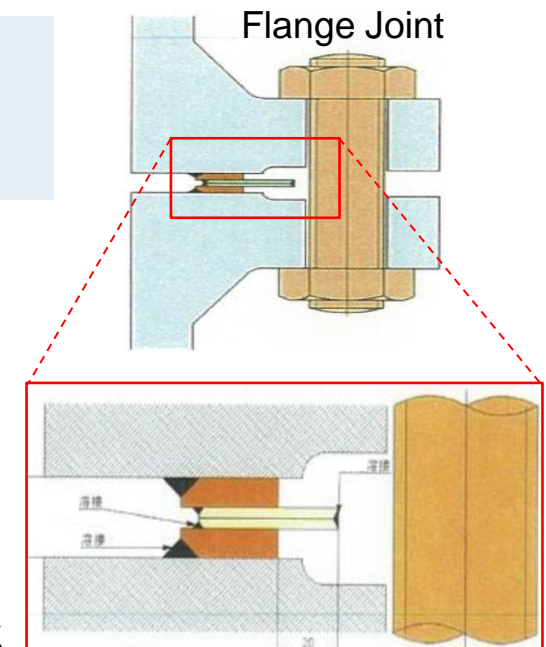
Lip Seal Welding Structure of the Flange Part
